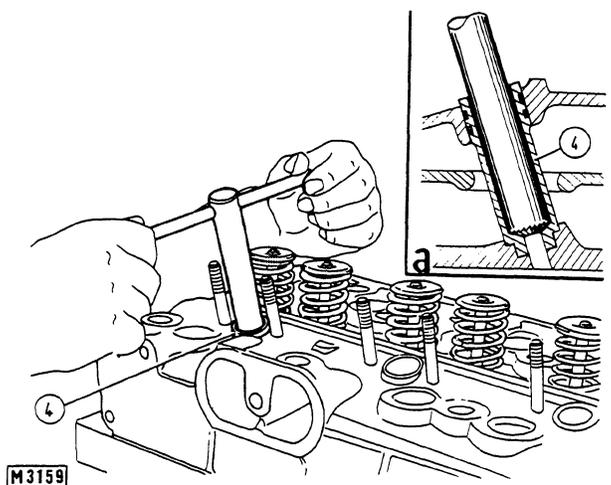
Refacing injector holder (4) with end teeth miller cutter 75291339.
